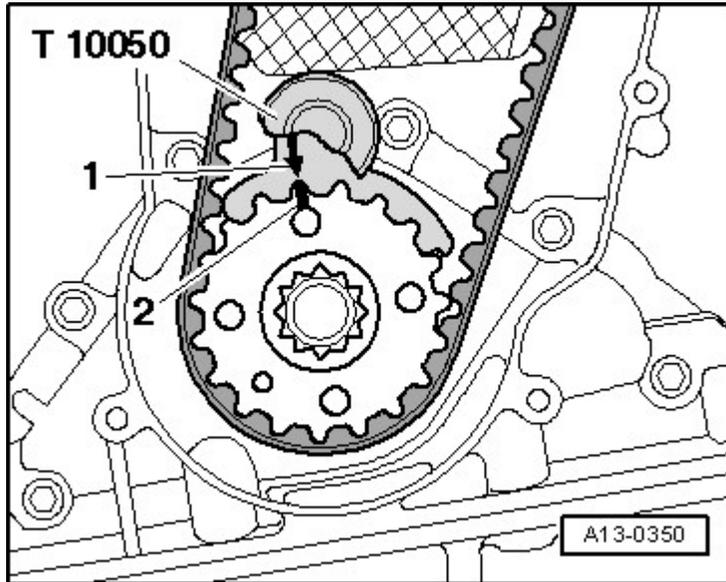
Identifying Crankshaft Toothed Belt Pulley And Crankshaft Stop T10050
